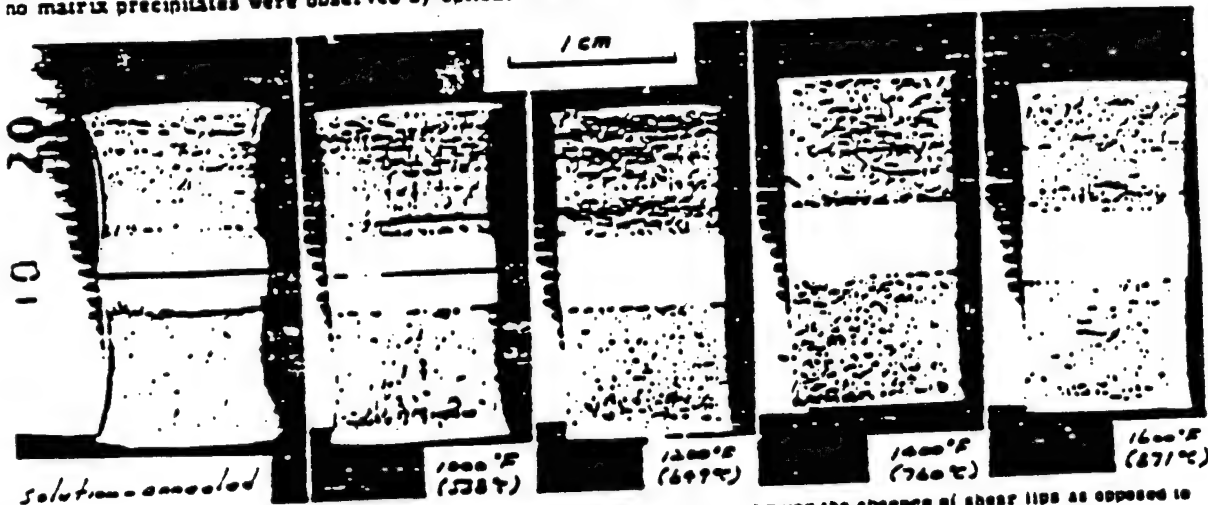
Fracture appearance of the 10,000 h aged Charpy impact specimens showing the absence of shear lips as opposed to the solution-annealed specimen.
